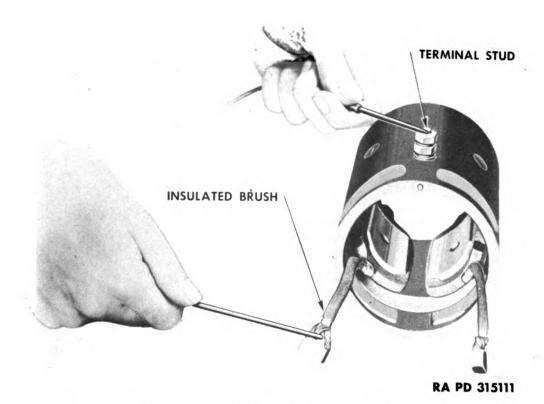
Testing Field Coils for Open Circuits with Test Probes—Group 1 Motors
